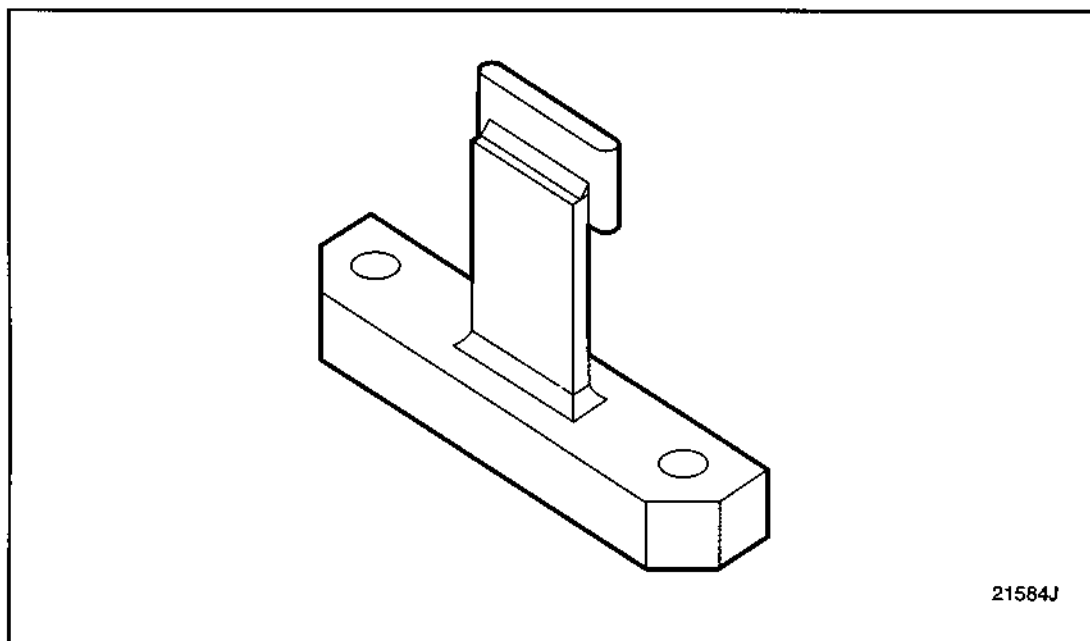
Cam Gear Retaining Tool,J 35652
